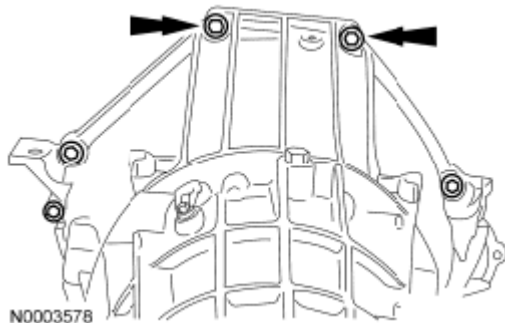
Locating Upper Transmission-To-Engine Bolts
